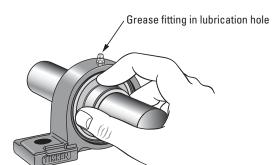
Installing grease fitting into threaded lubrocation hole.
